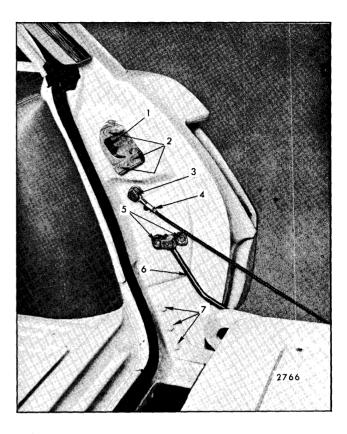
Tail Gate Torque Rod, Hinge and Support Attachments "A" Body Styles
